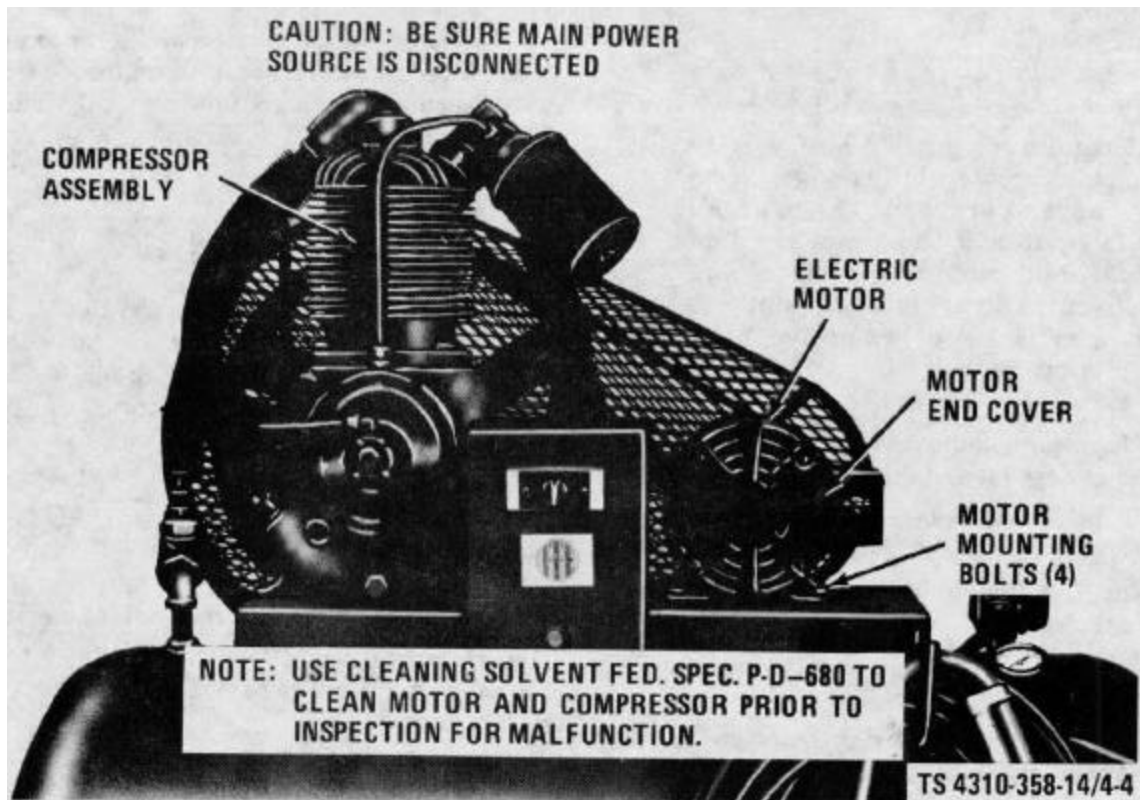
Electric motor and compressor assembly, removal and installation.
